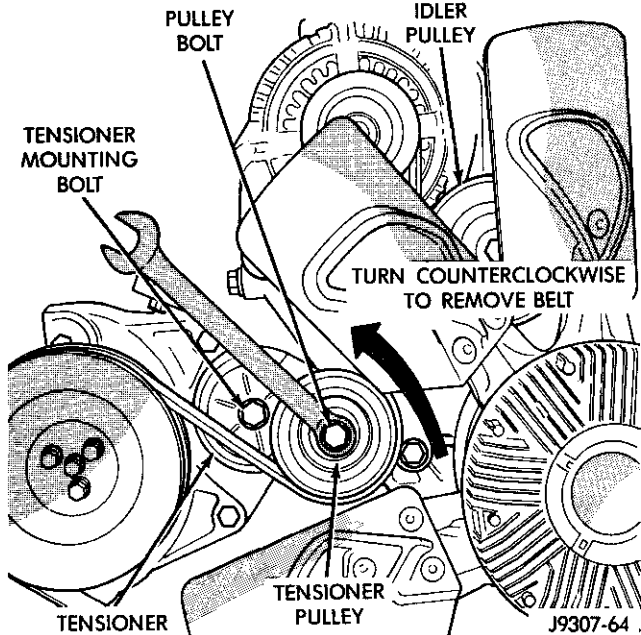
Belt Tensioner—5.9L HDC-Gas Engine
